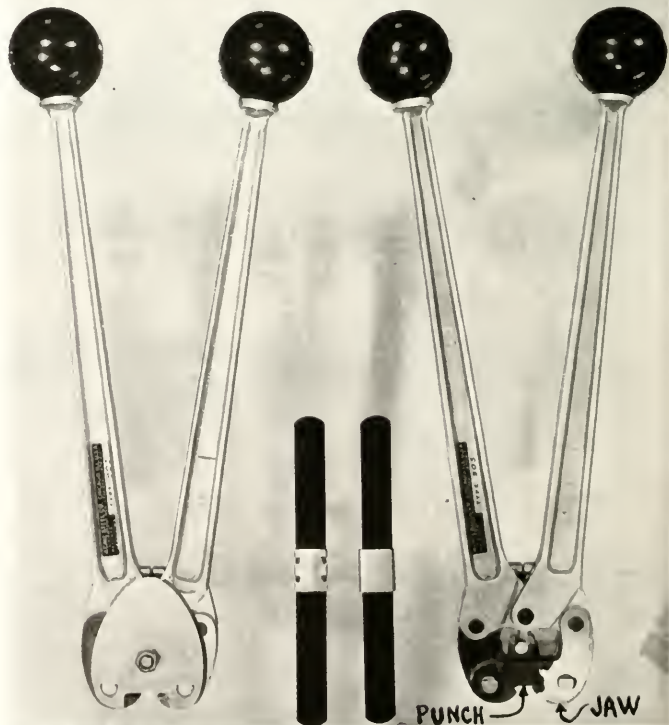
Band-sealing tool with sealed and unsealed joint. Cover plate and one jaw have been removed from tool on right to show construction.
